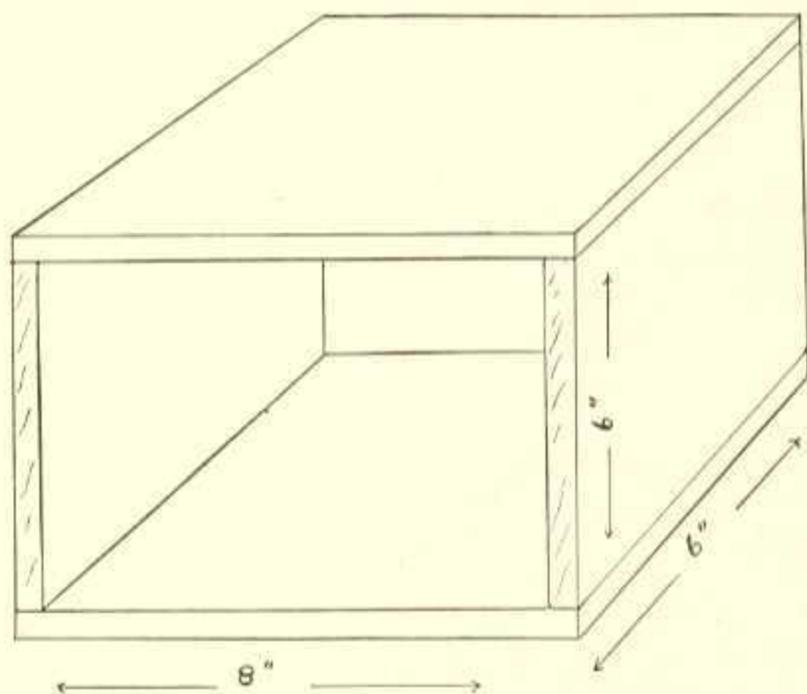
The Completed Cabinet without the Panel or Front Piece.
